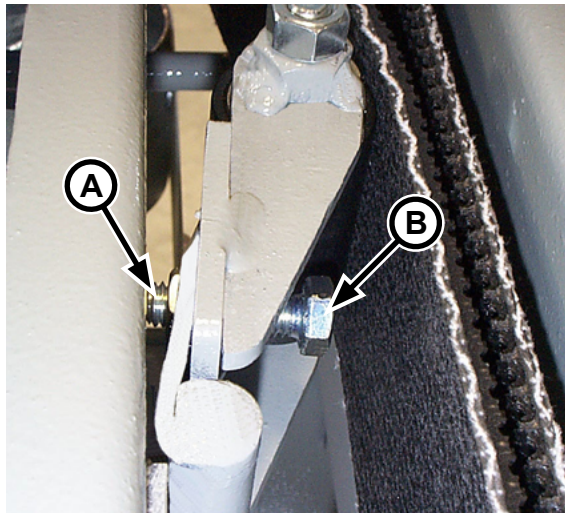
Spreader belt gap adjustment locknut (A) and bolt (B).
